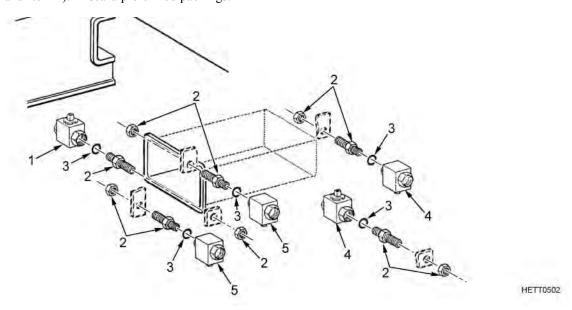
Gooseneck Isolation Valve Assembly Removal.
